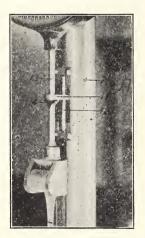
Detail C of motor-driven machine M shown in Fig. 5
